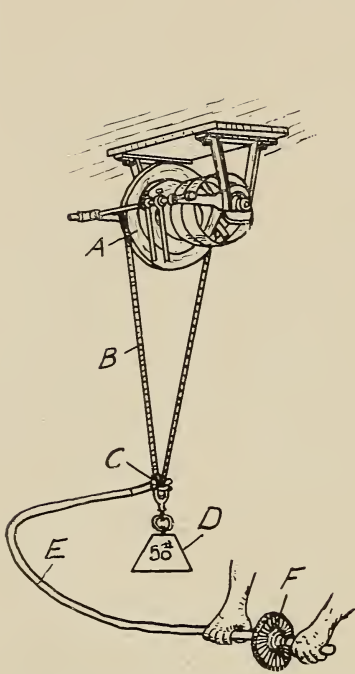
BELT DRIVEN MOLD CLEANER.
